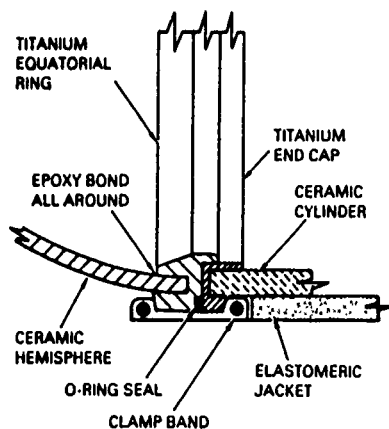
Modified NOSC Mechanical Joint for (1) Alignment, (2) Radial Support, and (3) Clamping of the *Ceramic Cylinder to Ceramic Hemisphere* in the 12-inch-OD Housing.
